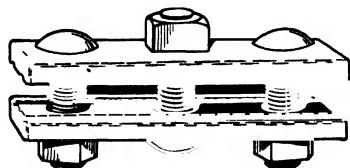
Three-bolt guy-wire clamp. (Courtesy Hubbard & Co.)
